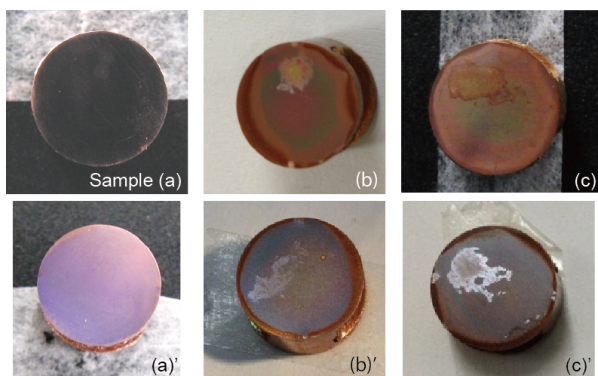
Appearance of fracture surfaces of copper rods.
